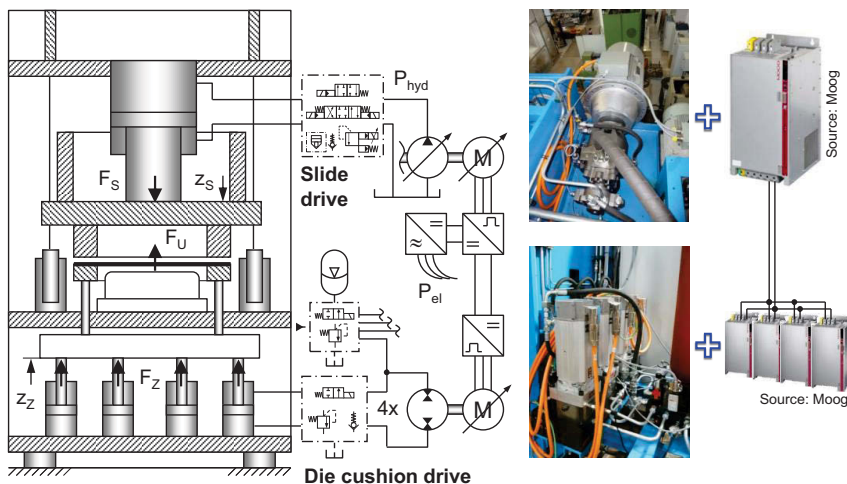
Hydraulic deep drawing press with pump controlled die cushion drive
